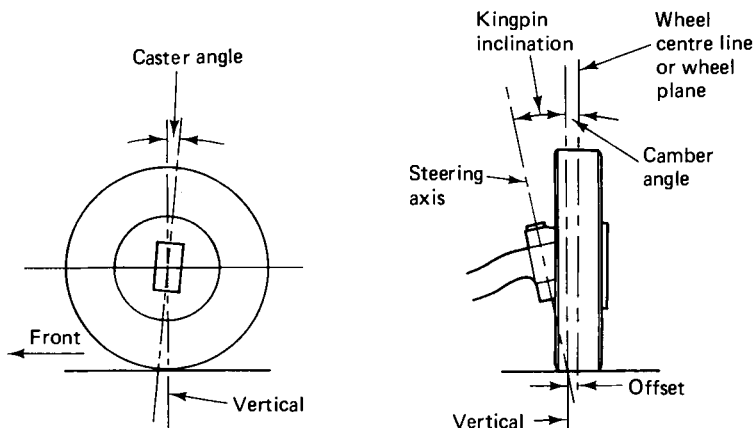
Left: side view of steered wheel. Right: steered wheel viewed from forward; the illustration shows a wheel with a small positive camber
